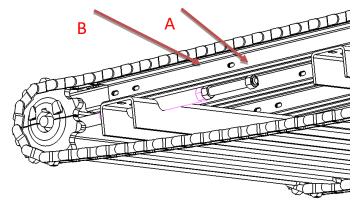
Sectioned View of the Floor Chains with Adjustment Rods
